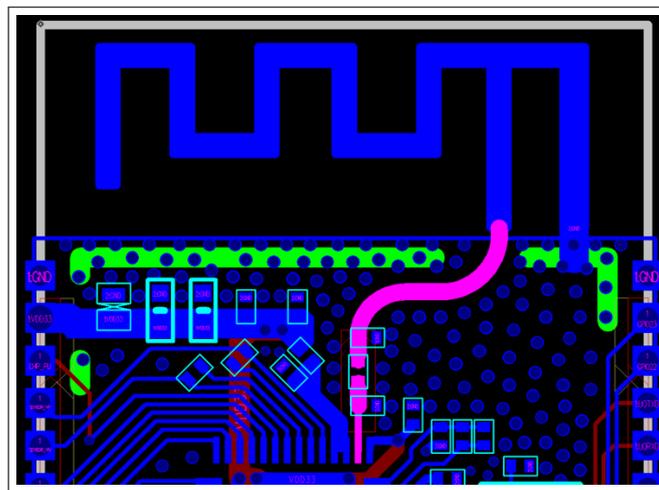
ESP32 RF Layout in a Two-layer PCB Design
